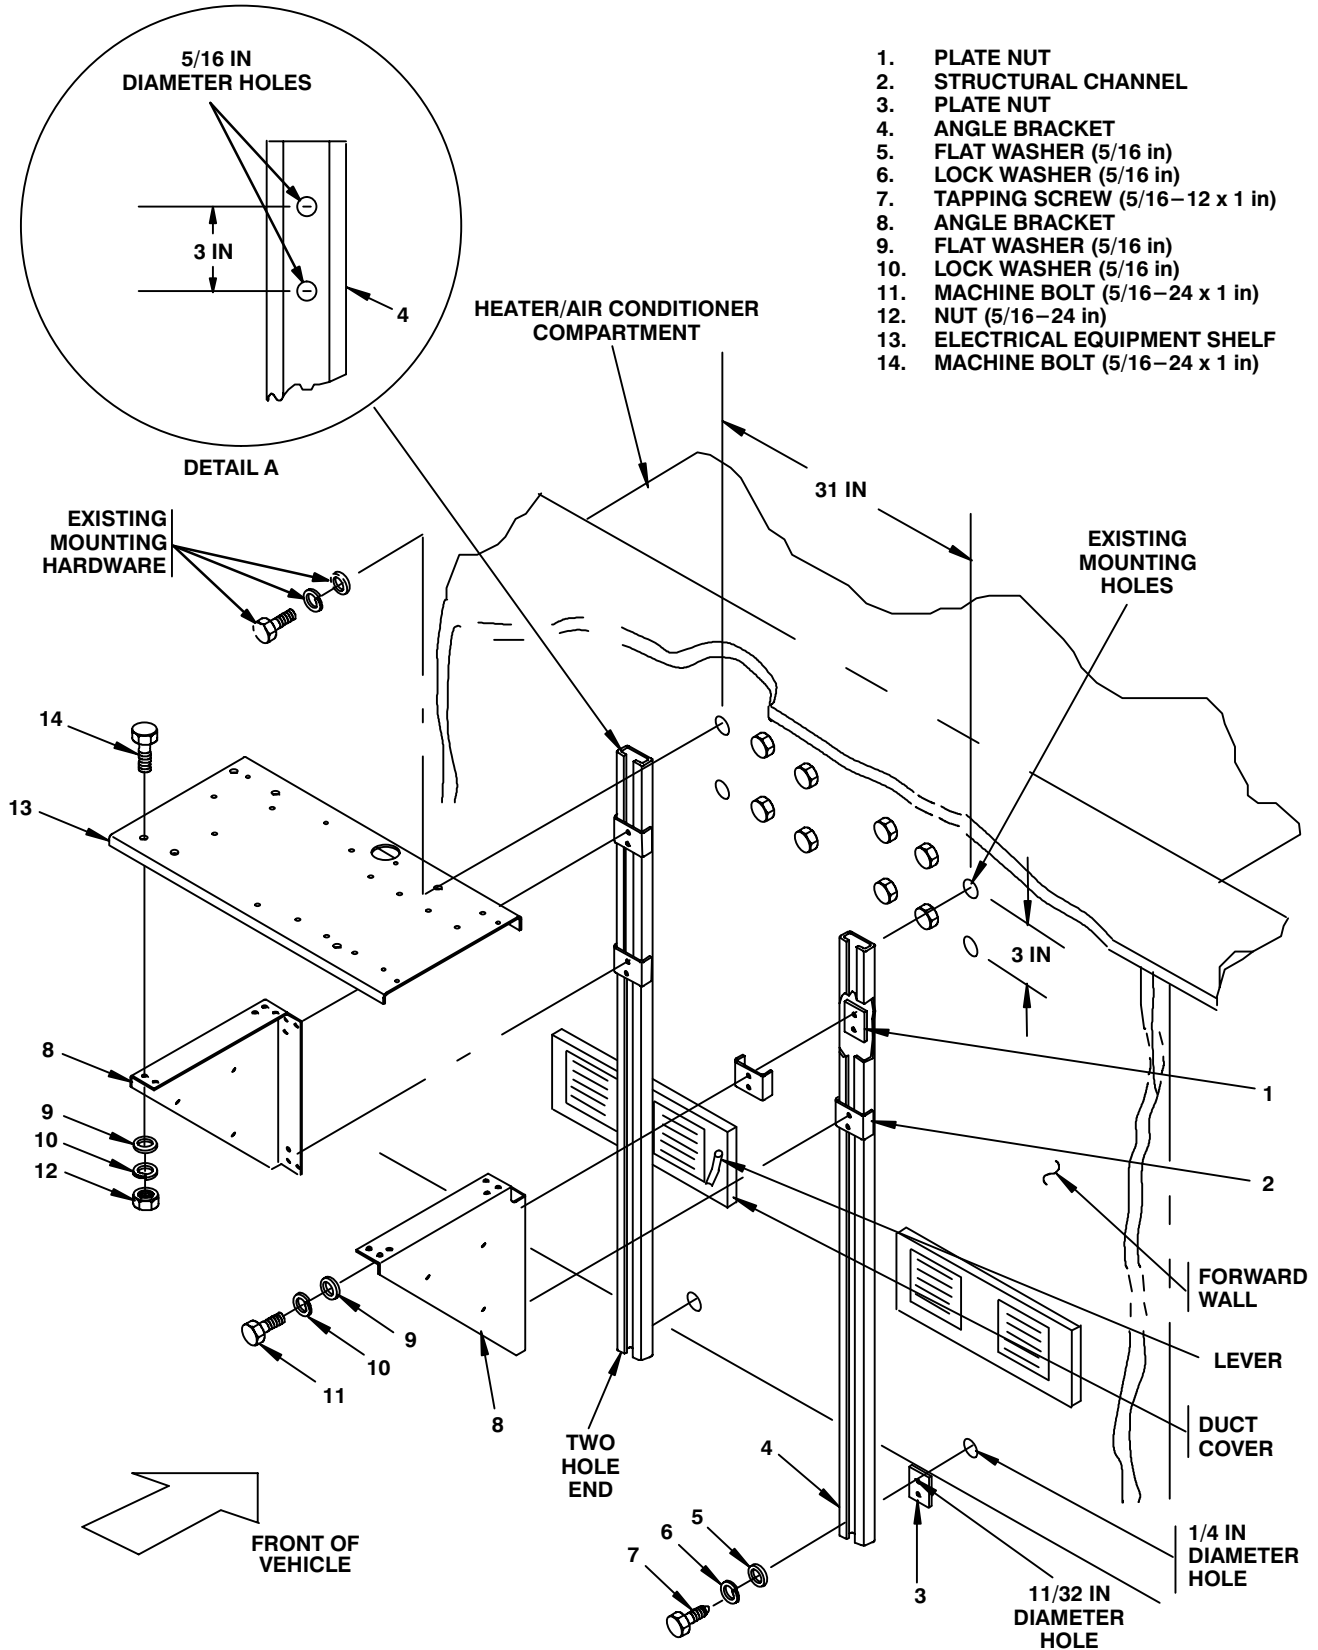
(1). Electrical Equipment Shelf Installation: Typical Installation
